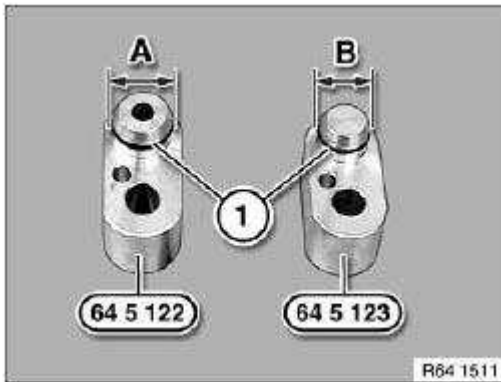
Identifying Special Tool 64 5 122, 64 5 123 & Sealing Rings
